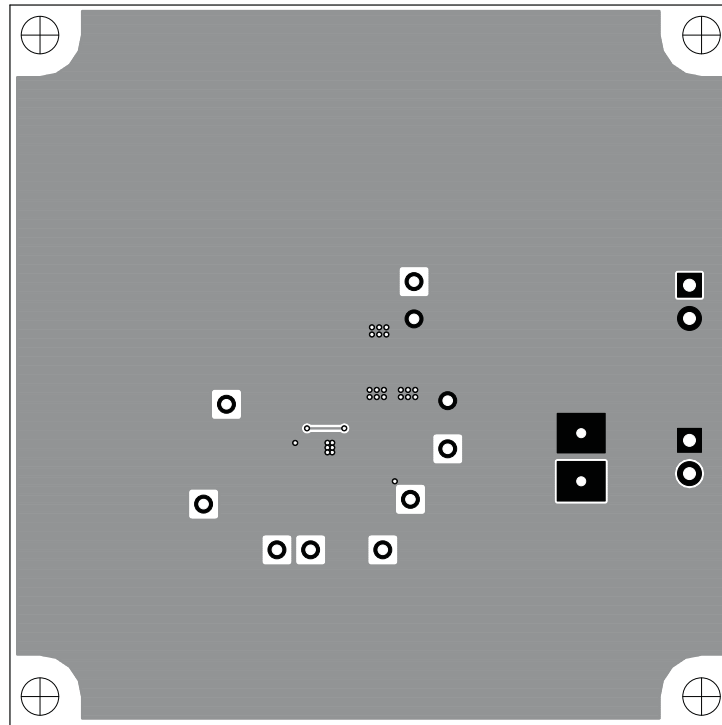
TPS54140EVM-429 Bottom-Side Layout
